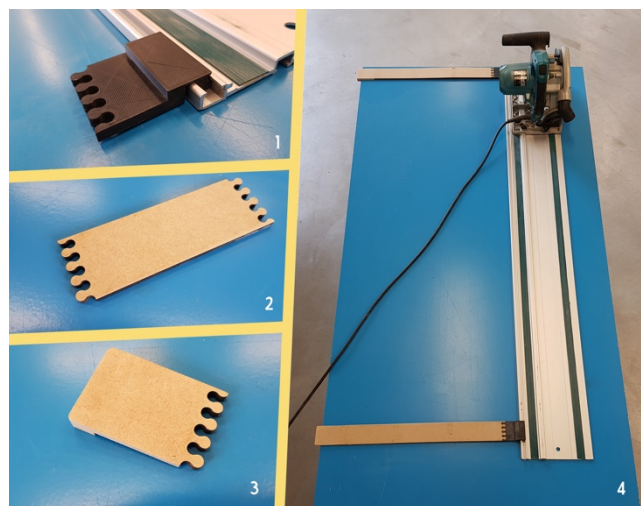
1. connector piece 2. universal puzzle piece 3. edge constraining puzzle piece
